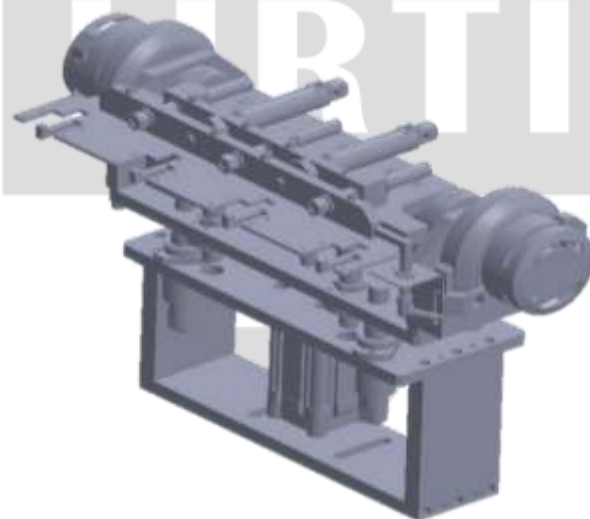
Ejector Unit of Stretch Blow Molding Machine
